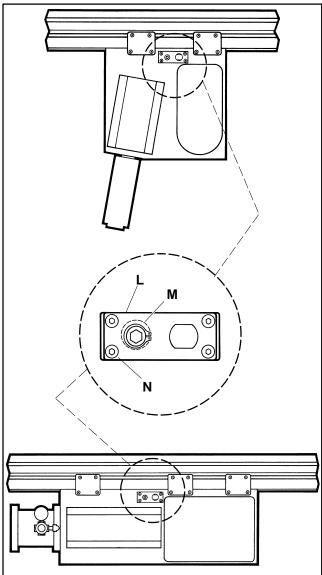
Belt Tracking Cam Locations for Center Drive Assemblies
